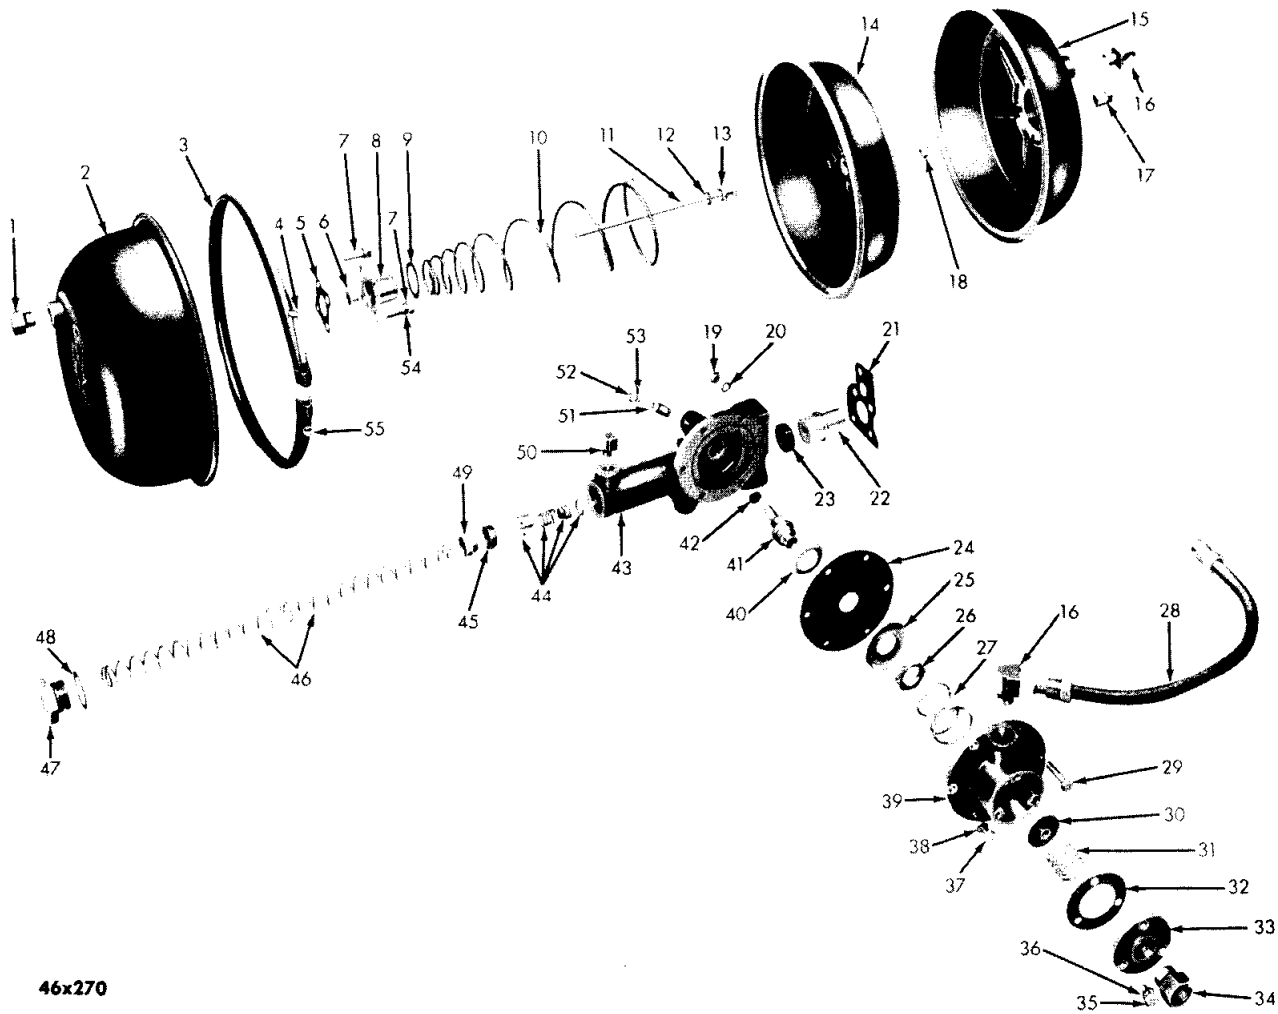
Vacuum Booster Brake (Single Diaphragm) (Sectional View)
